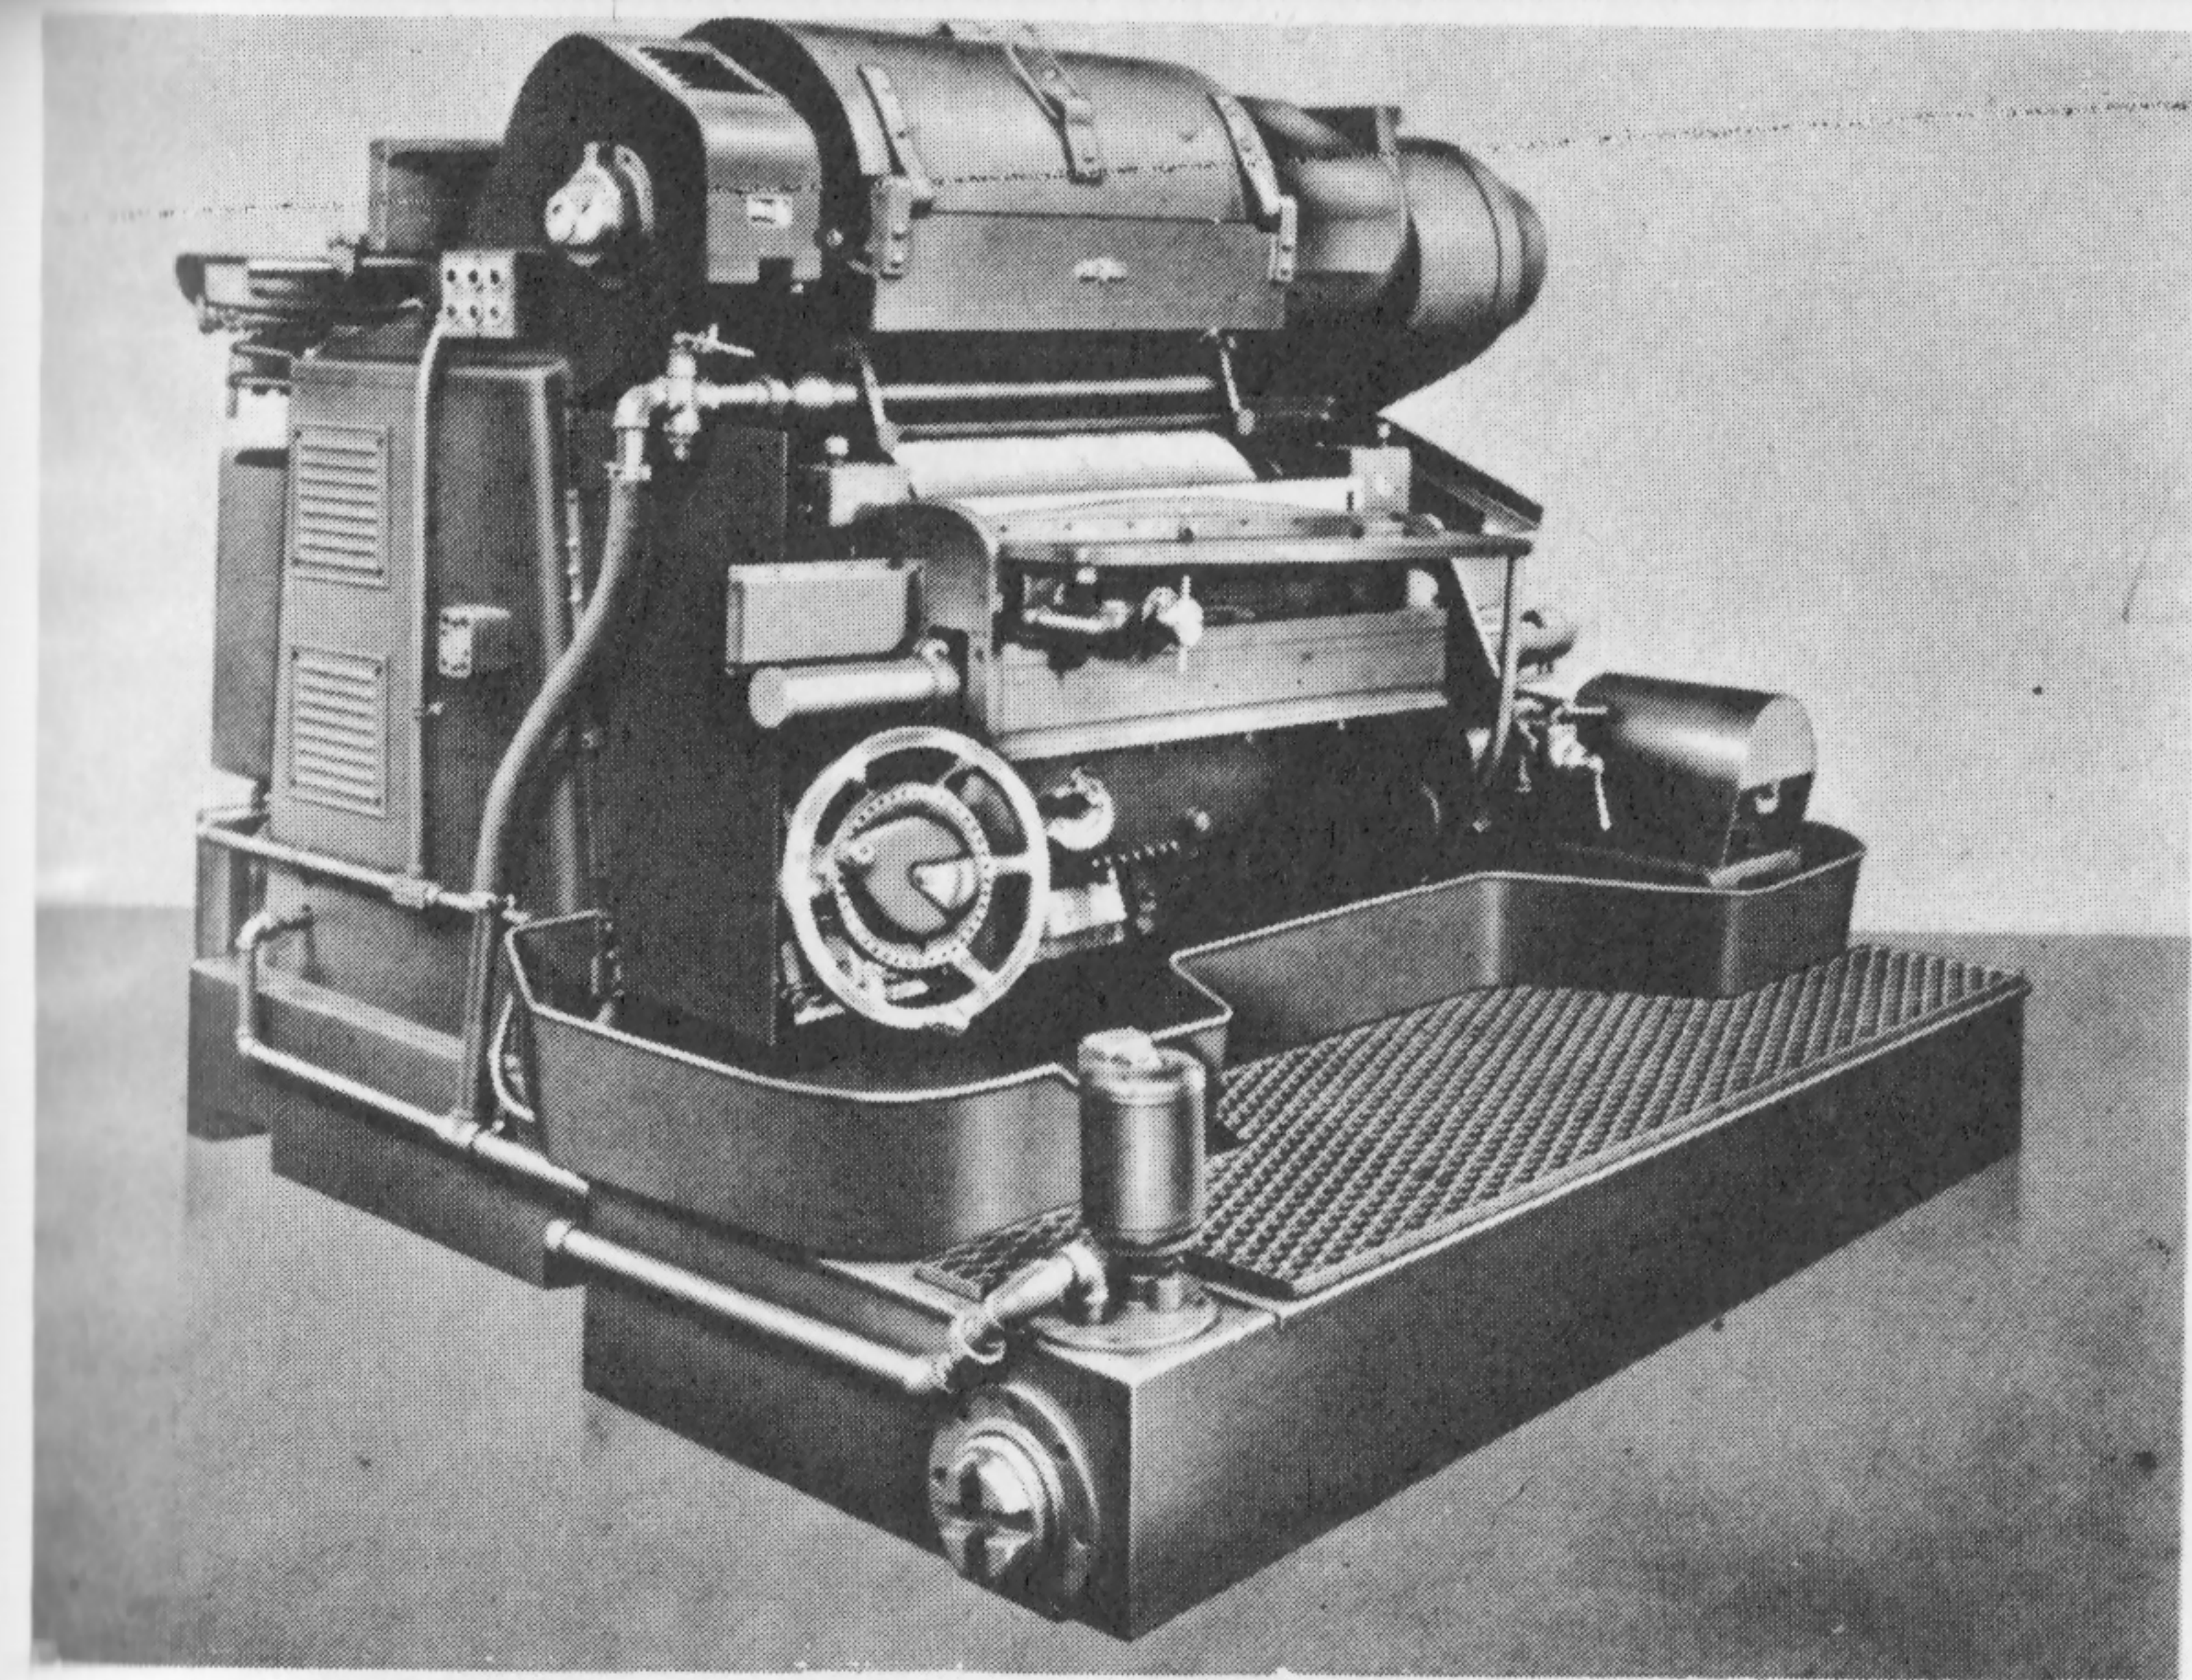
CINCINNATI CENTERLESS MACHINE FOR GRINDING AUTOMOBILE CRANKSHAFTS AND ENGINE PISTONS, 1932 (*Cincinnati*)
